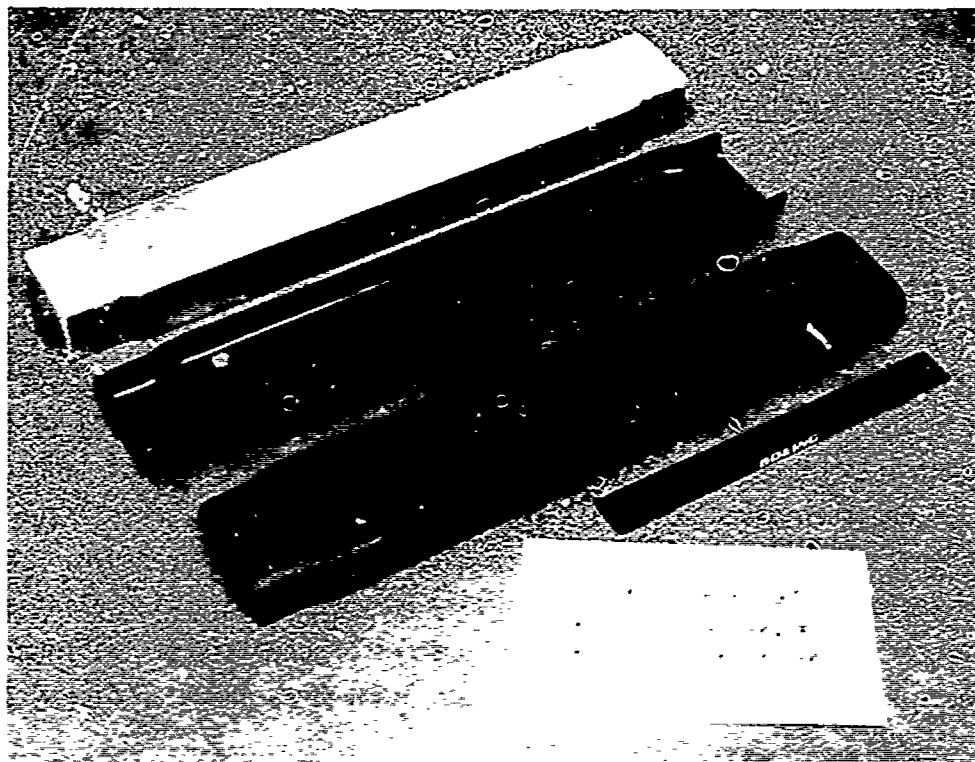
Vacuum Formed Shear Web (0/90)_S Sheet Stock
